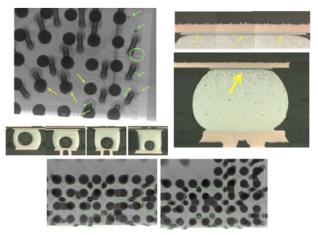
Solder Defects with Solder Joint Encapsulant Material B on Fine Pitch TV Control
